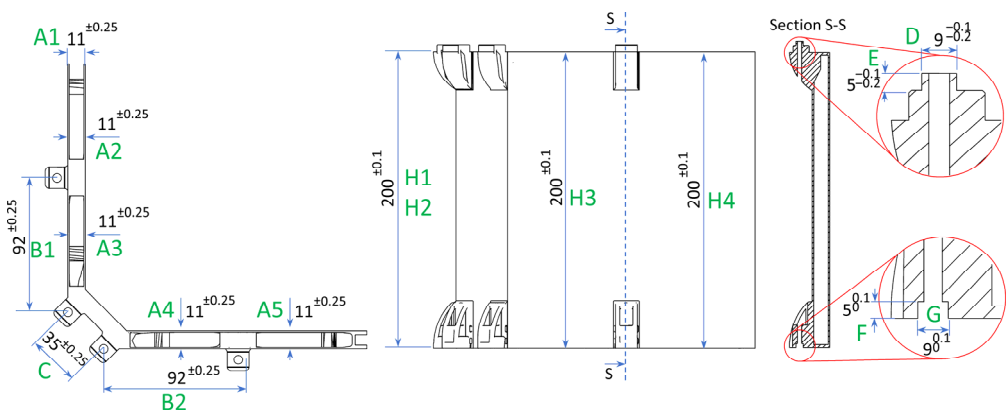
Component dimensions and tolerances and measured zones (in green).
